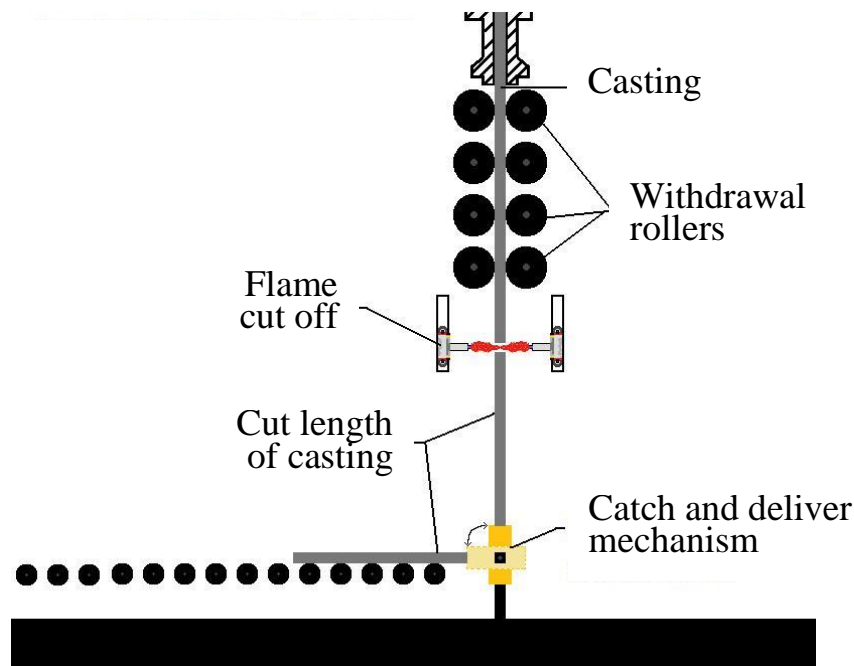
Alternate method of cutting slabs for continuous casting manufacture
